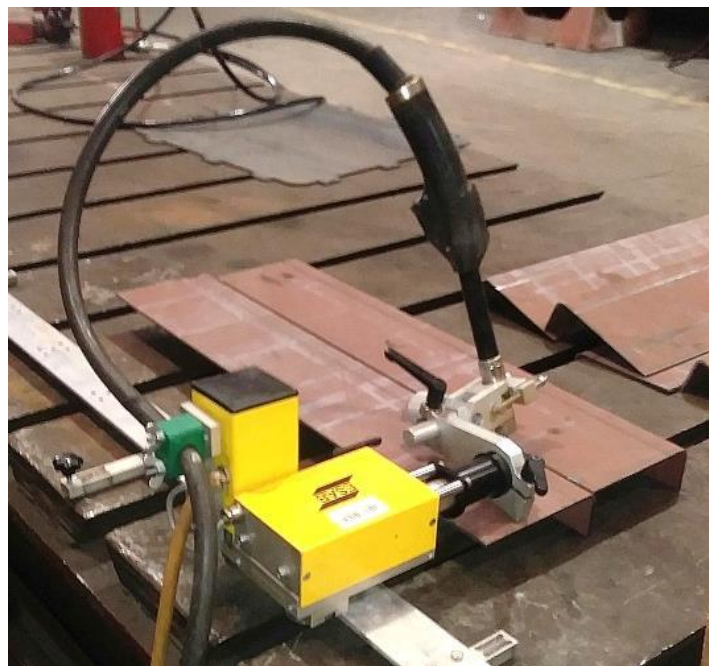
Railtrac carriage, welding position and type of joint
